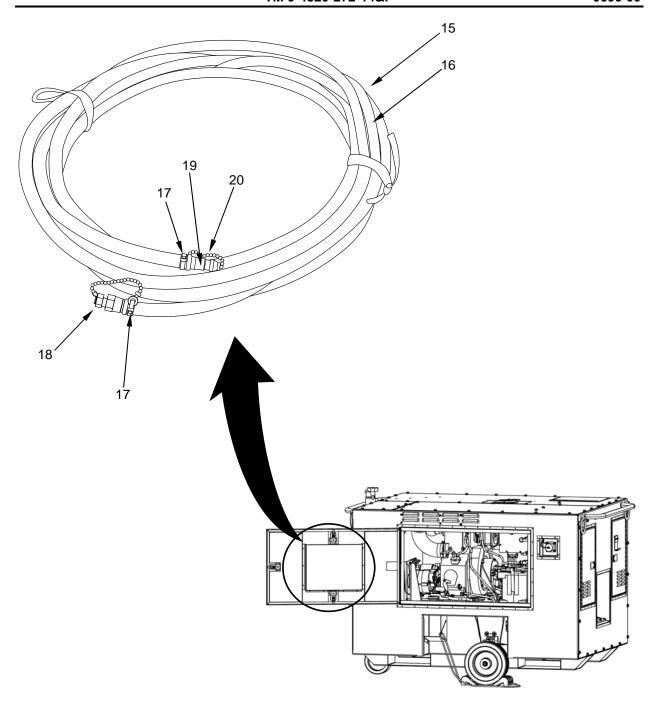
Assembly, Fuel Hose, External (Sheet 3 of 3).
